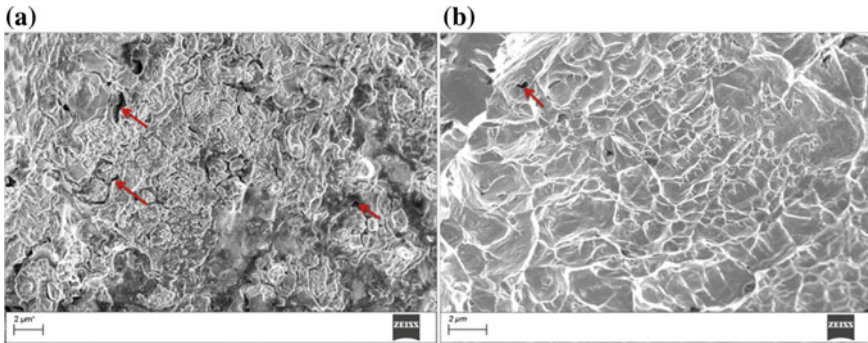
Tensile fracture surfaces of a as-received and b ST2 weld
